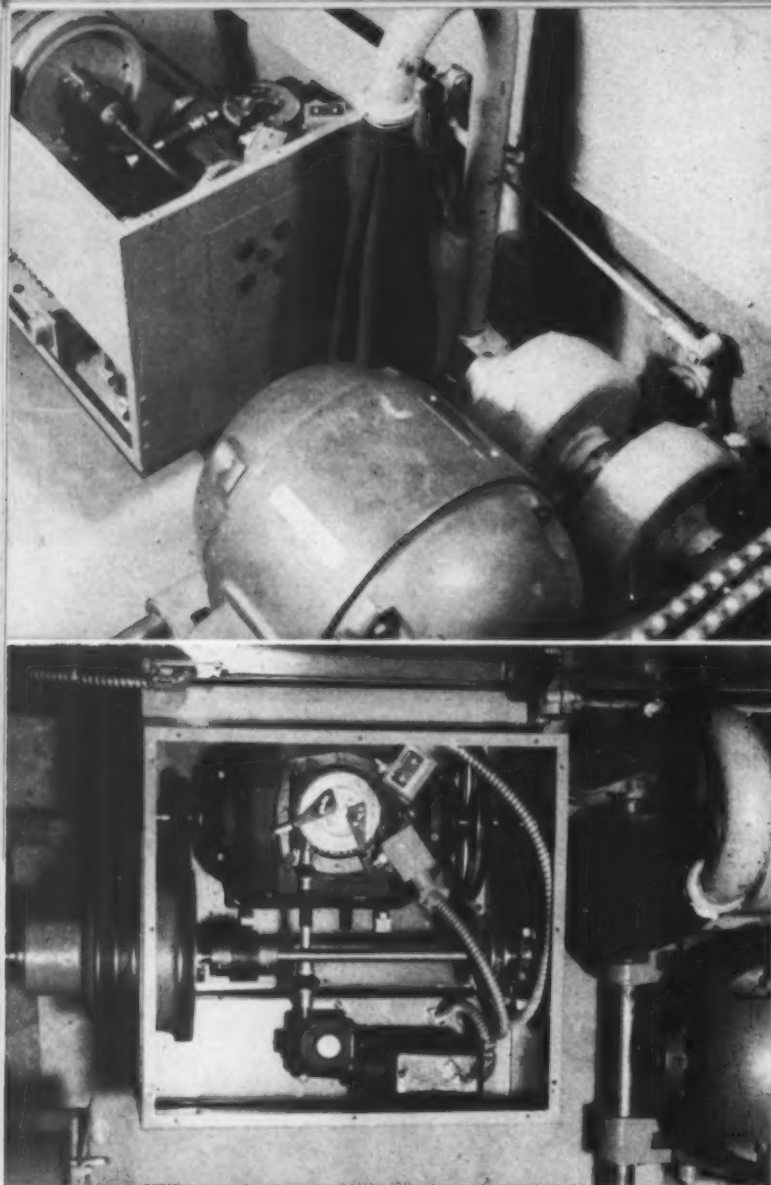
(a) Top—Drive assembly with control cable disconnected and covers removed to show space limitation surrounding the design. (b) Plan view showing general arrangement of the drive system. Power input is through the paired V-belts, output shaft is at extreme left. Limit switches mounted on the transmission determine the extreme positions of the power-actuated adjusting dial
